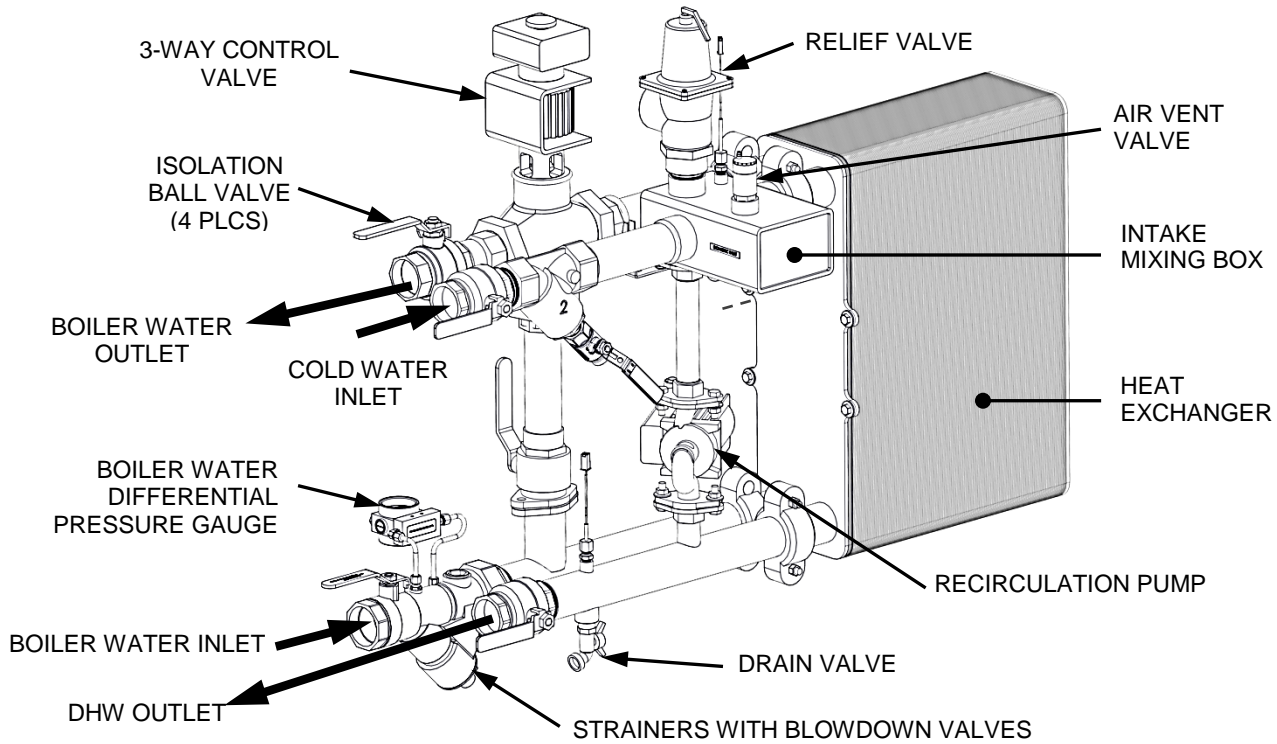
Typical SmartPlate Piping Assembly – 2” Piping Shown
